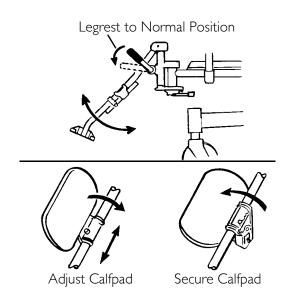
Raising/Lowering Elevating Legrests and/or Adjusting Calfpads
